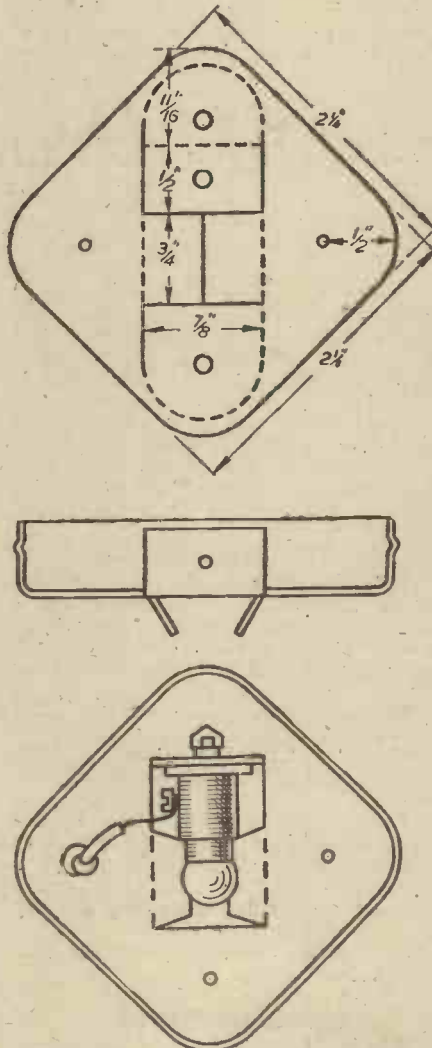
How the tin lid is marked out for cutting, and an interior view showing bulb in position.
